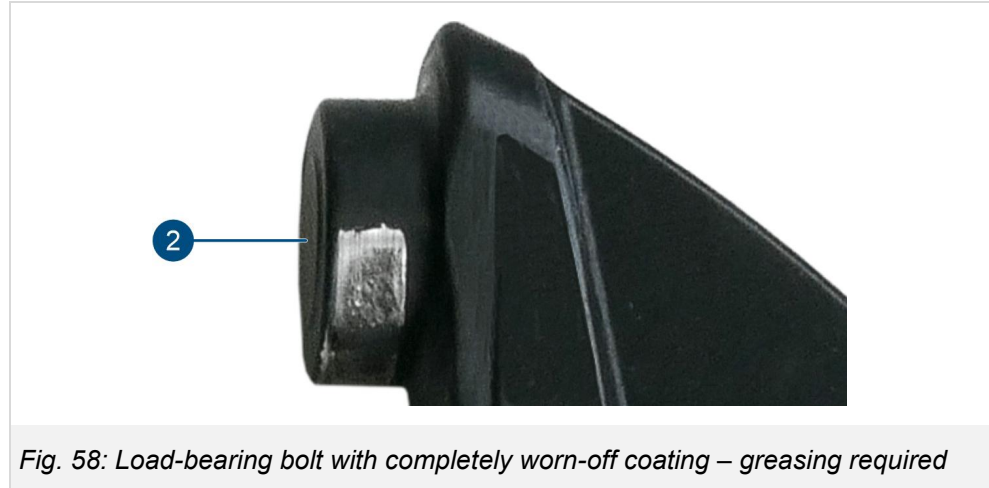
Load-bearing bolt with completely worn-off coating – greasing required
